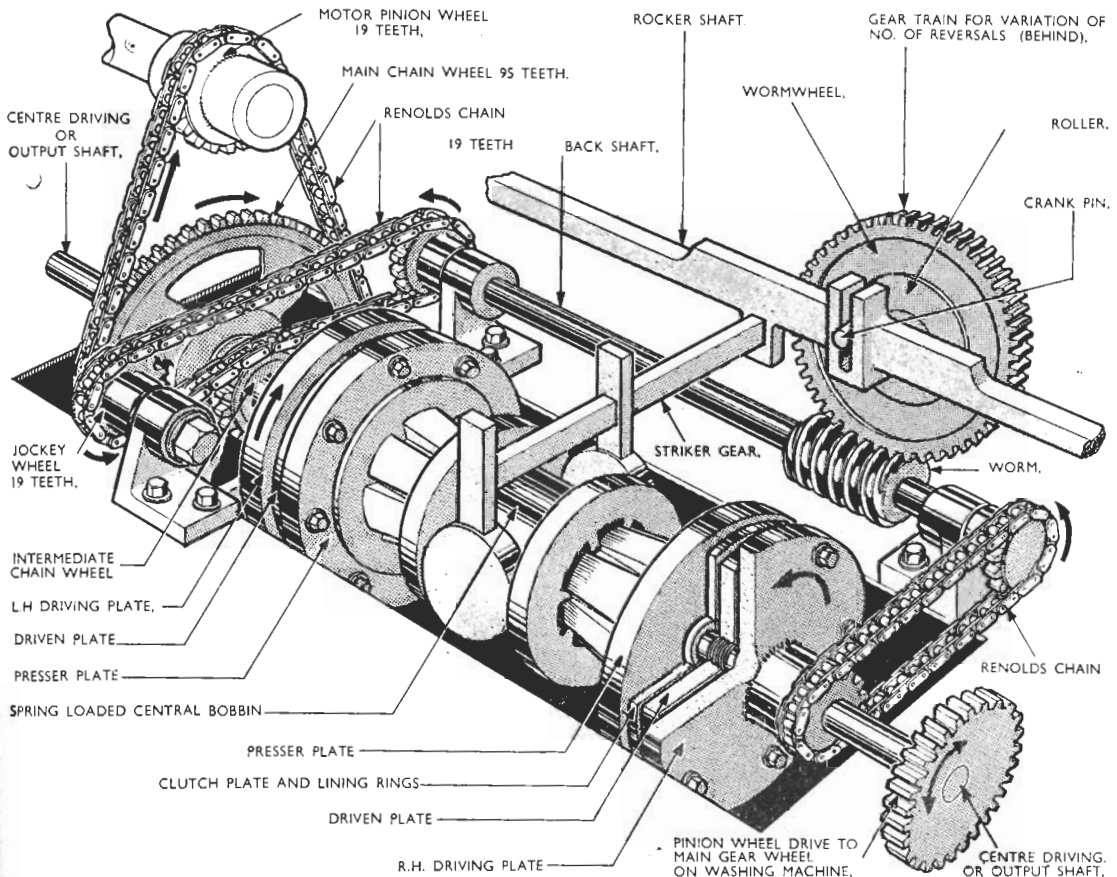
Diagrammatic arrangement of Lightburn reversing clutch.
